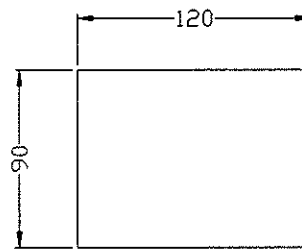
Rectangle constructed and resolved, parametric dimensions added
